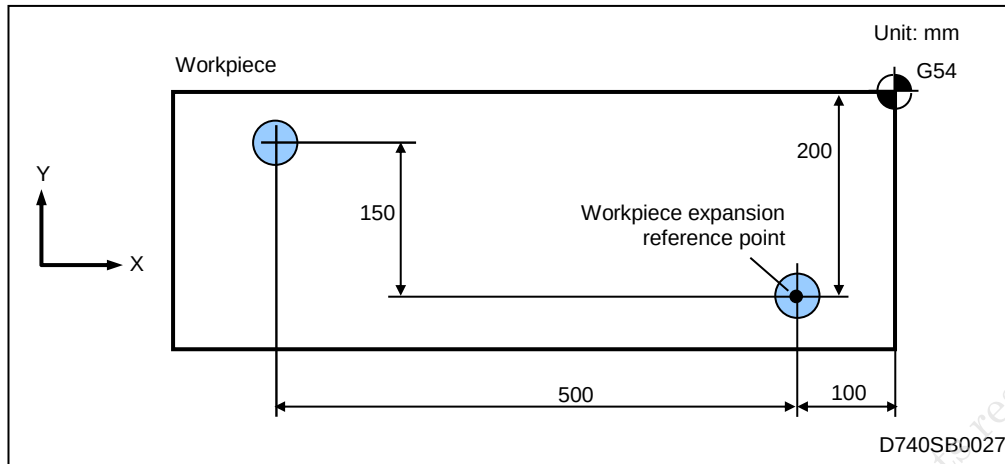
Hole machining in a flat aluminum plate (EIA/ISO)
